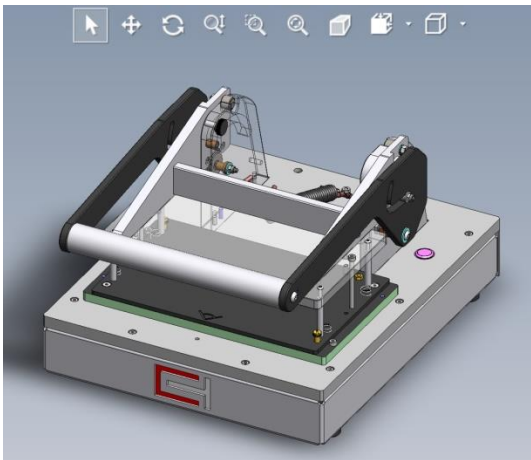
Full HPS-25 fixture designed in AutoCad.
